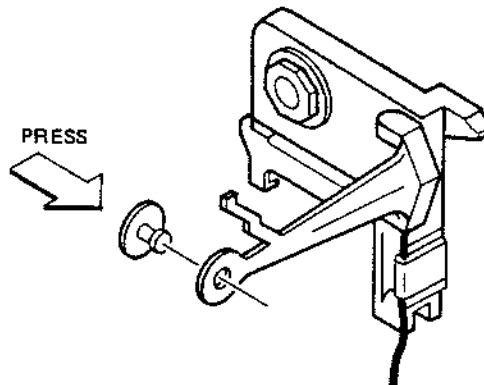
HEAD LOAD BUTTON REPLACEMENT
